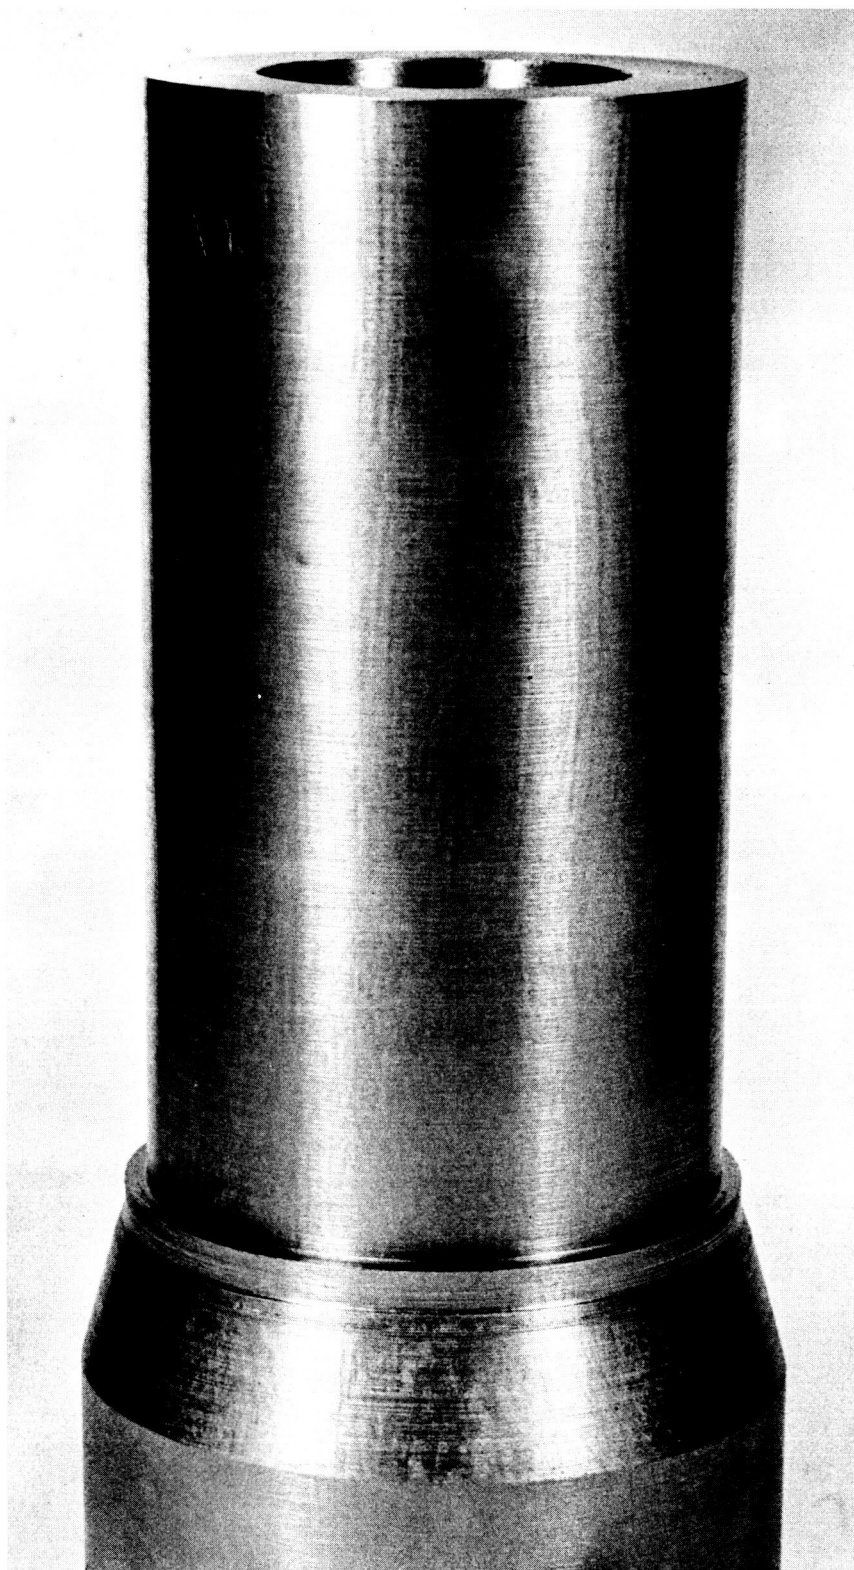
Semi-Machined 100-lb Columbium Chamber (Bar Stock)
